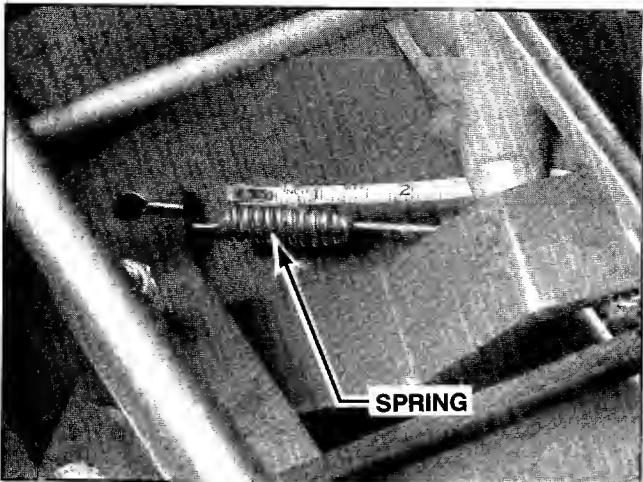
Measure length of blade drive tension spring while blade control is engaged.
